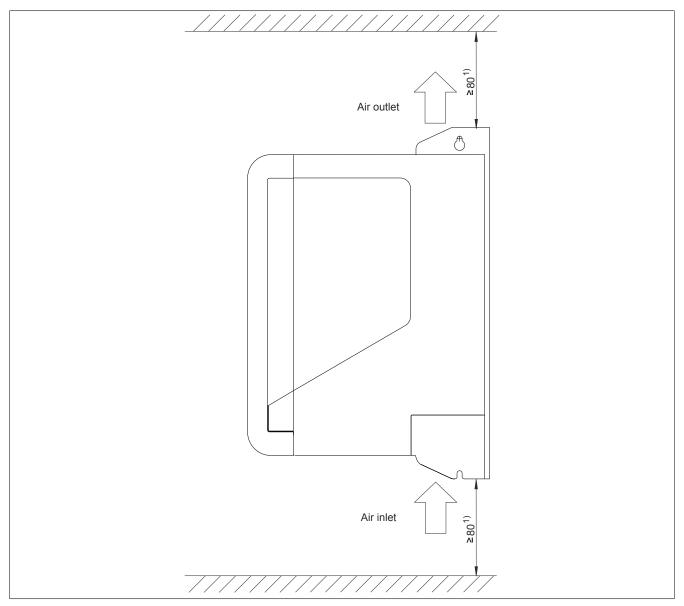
ACOPOS P3 8EI servo drives - Installation dimensions
